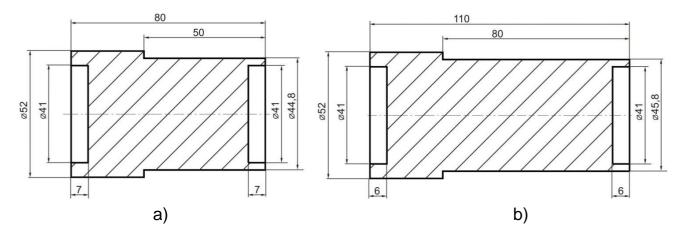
Mandrels for pressing out and pressing in the suspension arm silent blocks: a) – upper arm; b) - lower arm
